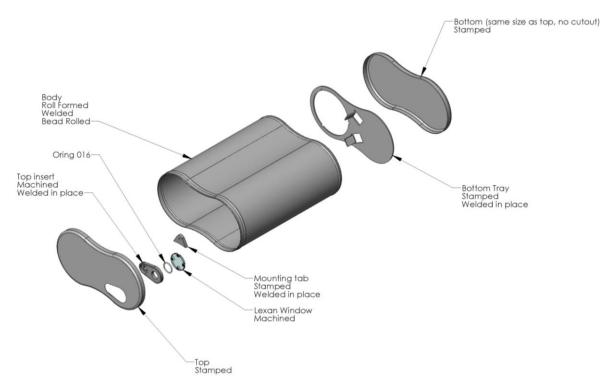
The Original Outer Can Is Comprised Of Stamped And Drawn Sheet-Metal Parts
